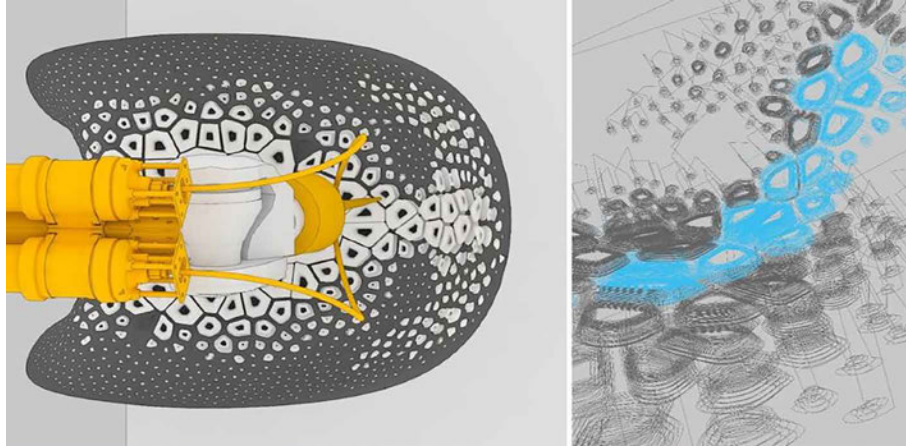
Robotic 3D printing of silicone on subtractively produced front concave surface of the Hybrid Chair (left); continuous printing toolpath (right).
